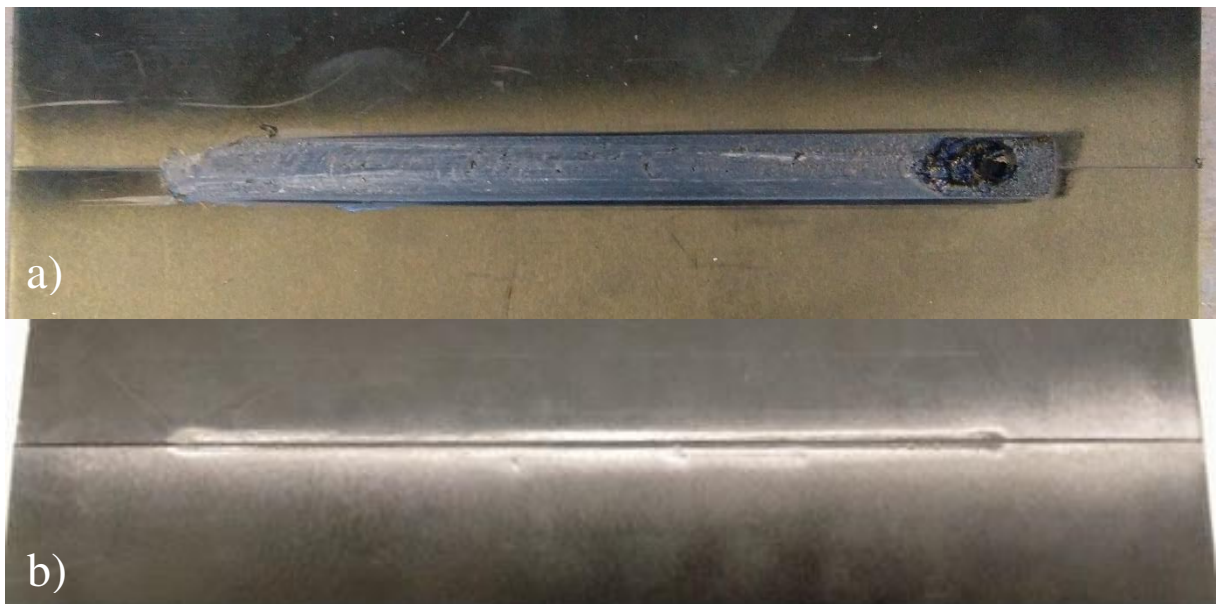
Weld from PEEK stationary tool first attempt, a) top view, b) bottom view.
